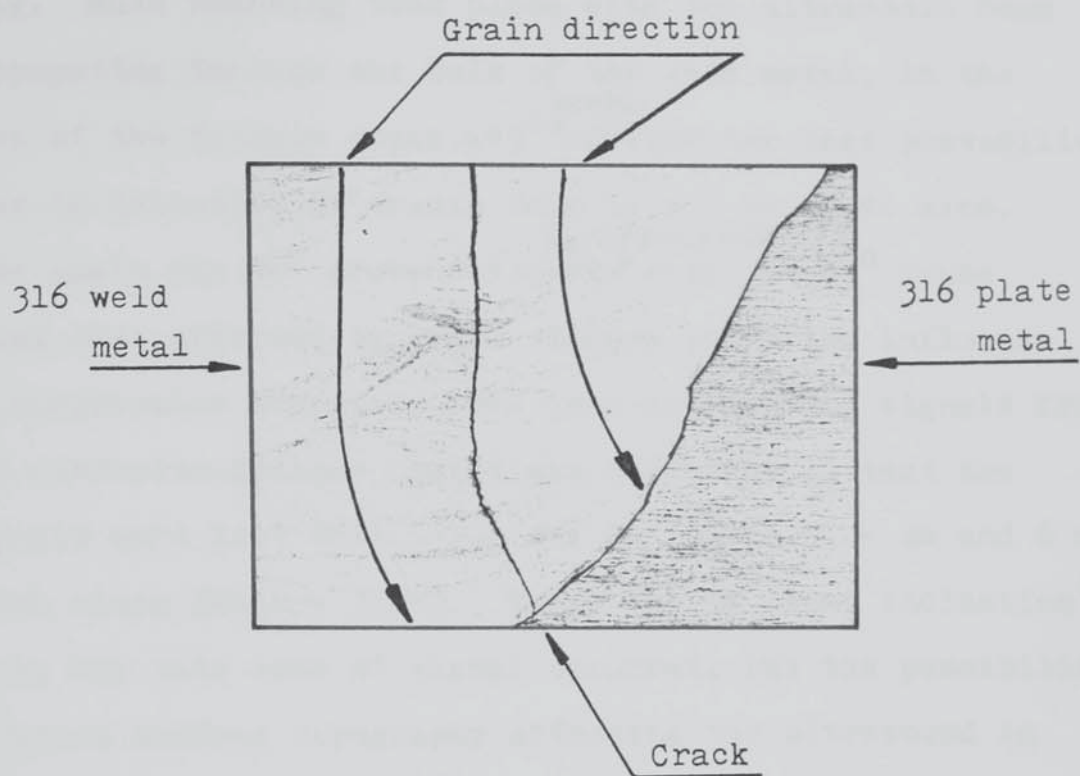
Profile of corrosion-fatigue crack in the weld metal of specimen S<sub>4</sub>
